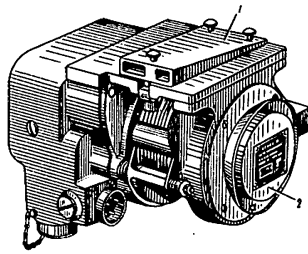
INSTALLATION OF BRACKETS ON БЛ-473M HOIST
